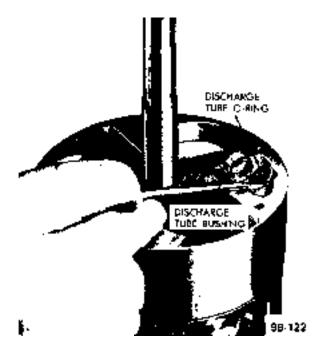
B-152 Installing Discharge Tube O-Ring and Bushing
